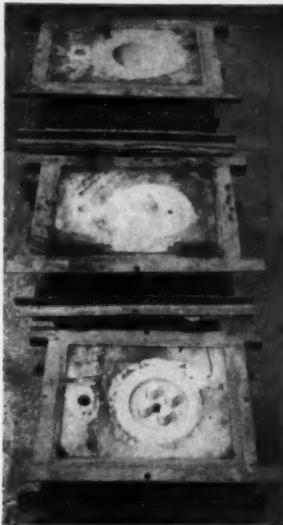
Mold assembly for the test casting—bottom, drag with four test cores pasted into bottom core; cope with cone shaped atmospheric pressure core; top, cheek section.
